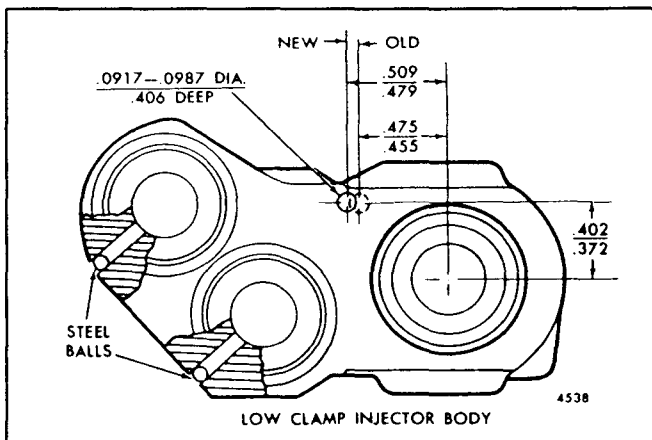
Relocating Timing Pin Hole in Injector Body
